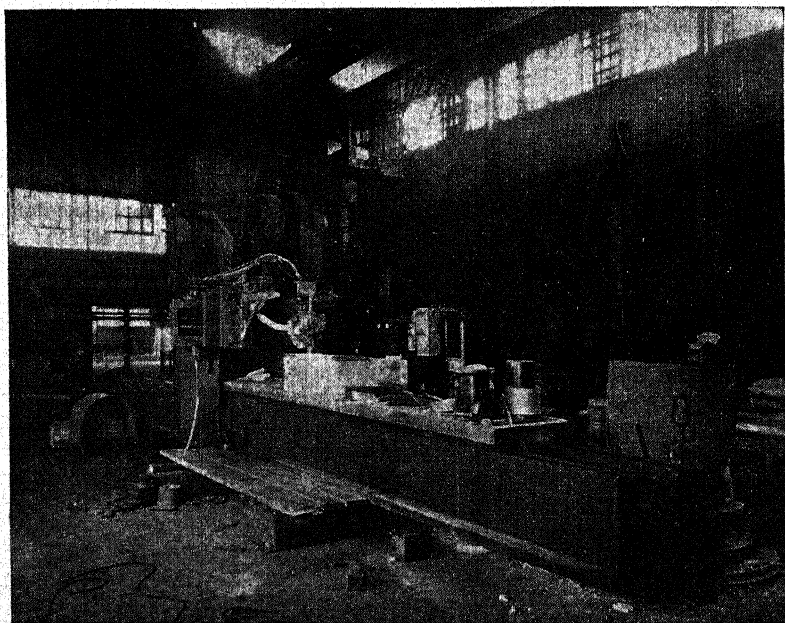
Experimental equipment used for making composite metals by carbon arc welding.
